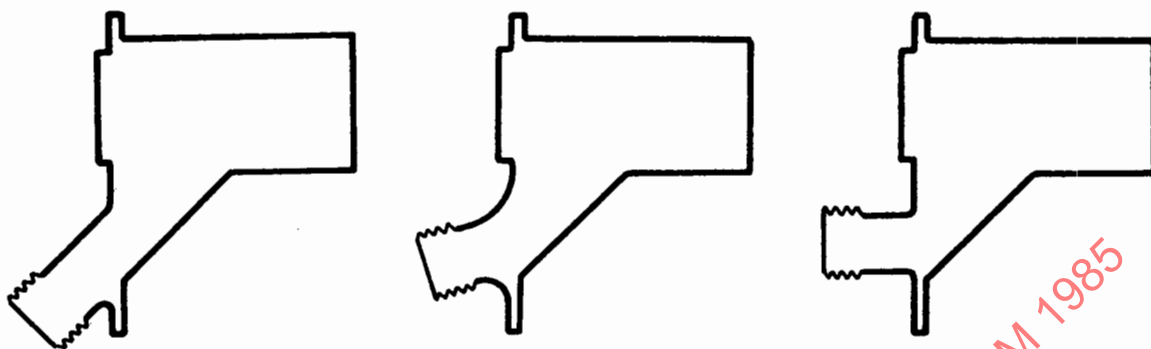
F STRAIGHT AND ANGLE OUTLET
